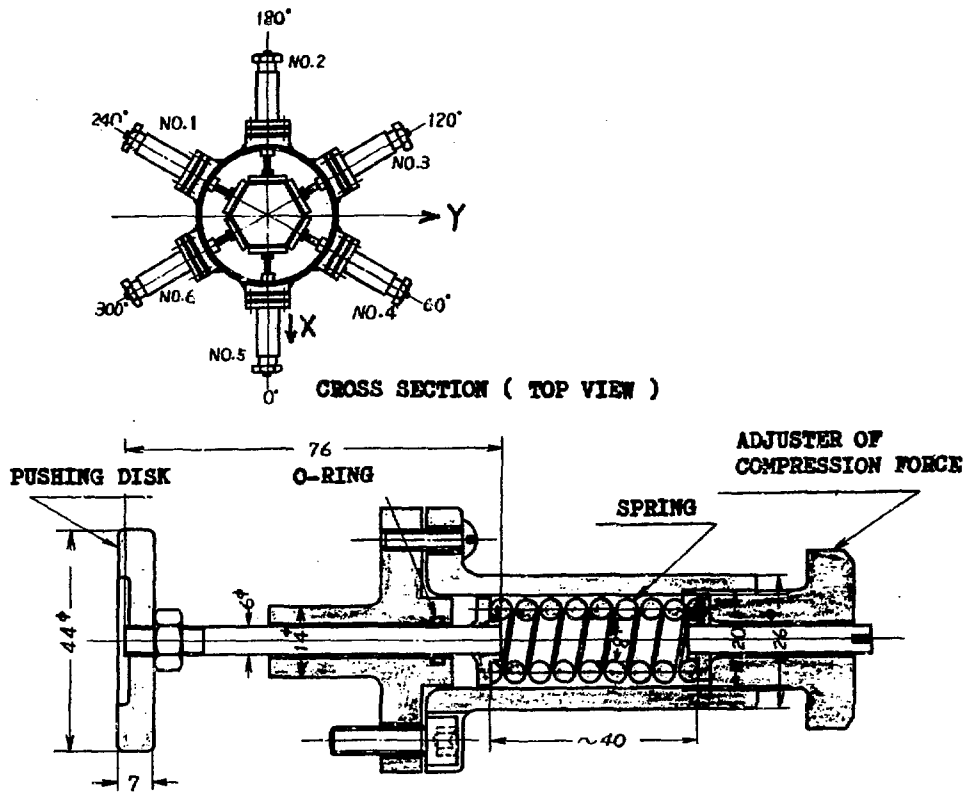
Compressing devices for spacer pads of fuel assembly
